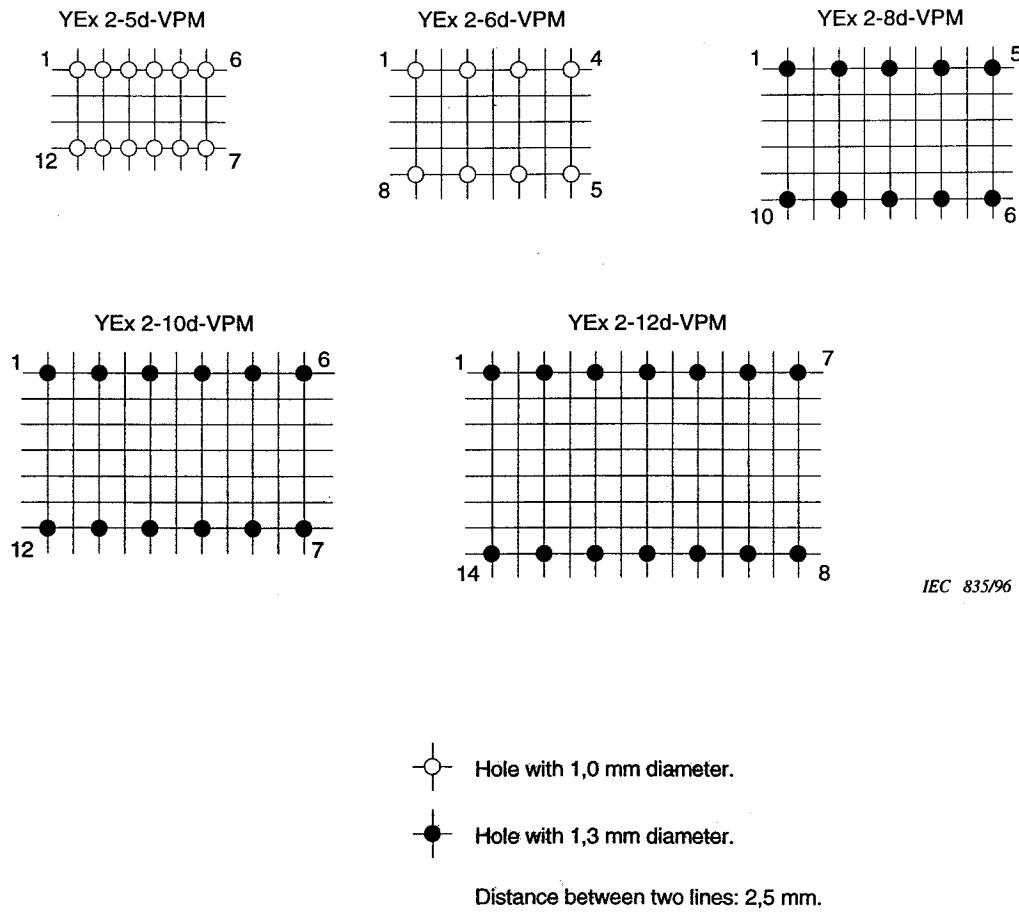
Grid plans for coil formers type YEx 2 for printed wiring board mounting, vertical mounting style, metric grid plan
